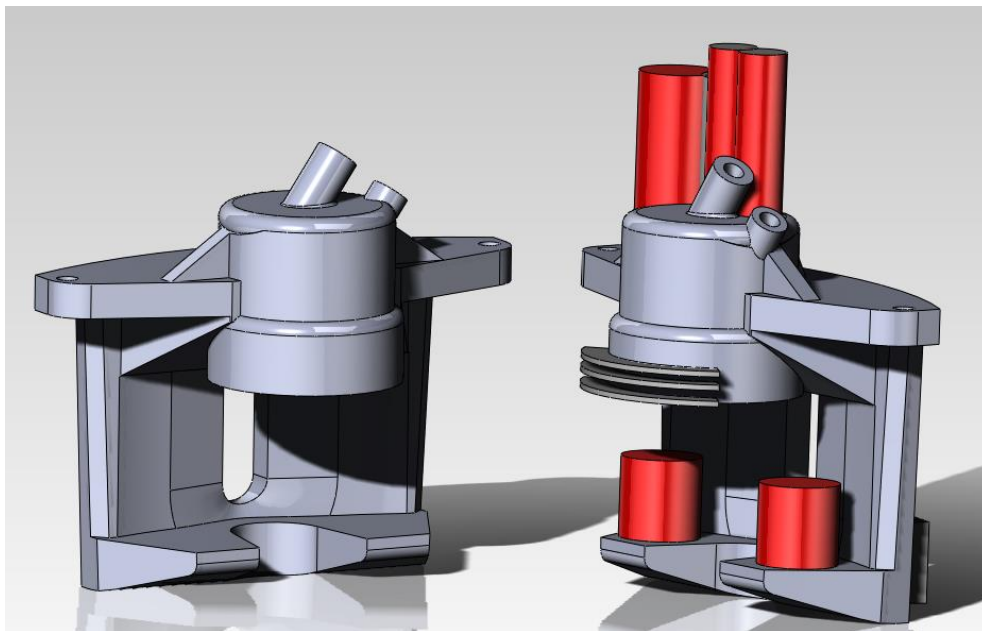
3a left side is the geometry of the calliper. Figure 7- 3b right side is the casting orientation with feeder and cooling fin
